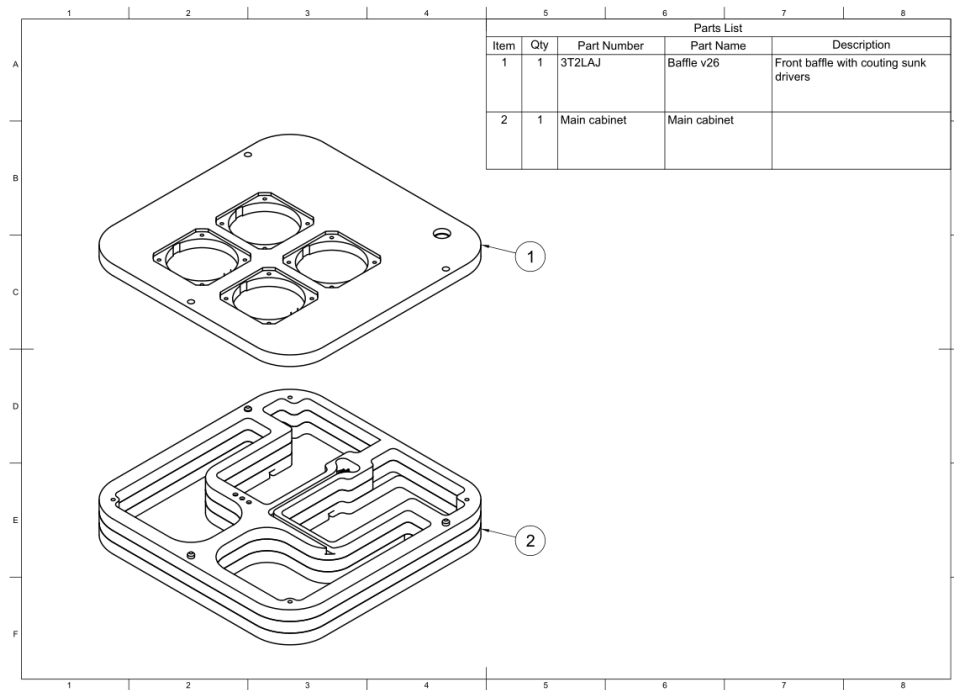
Exploded view of all the parts needed to mount the baffle to the main cabinet.
